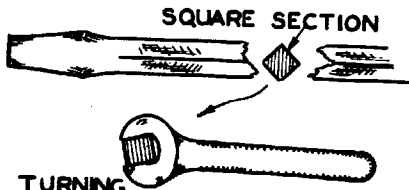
TURNING A SQUARE SHANK SCREW DRIVER WITH AN OPEN END WRENCH
